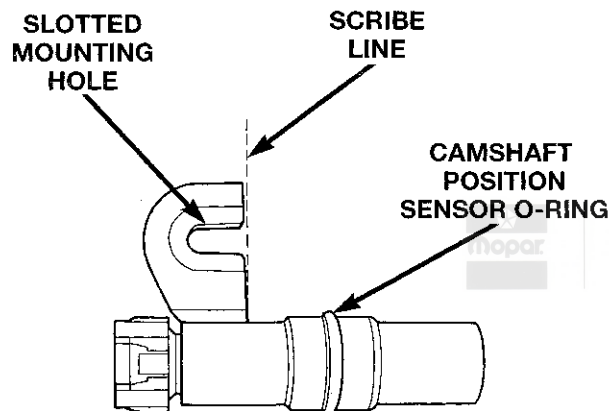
Camshaft Sensor O-Ring—8.0L V-10 Engine INSTALLATION
